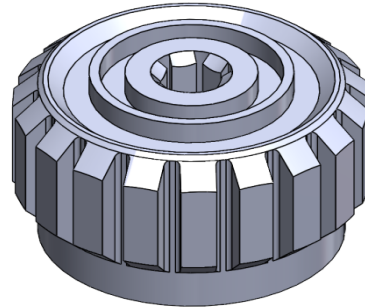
A CAD Model of the CY80 motorcycle Clutch Hub
